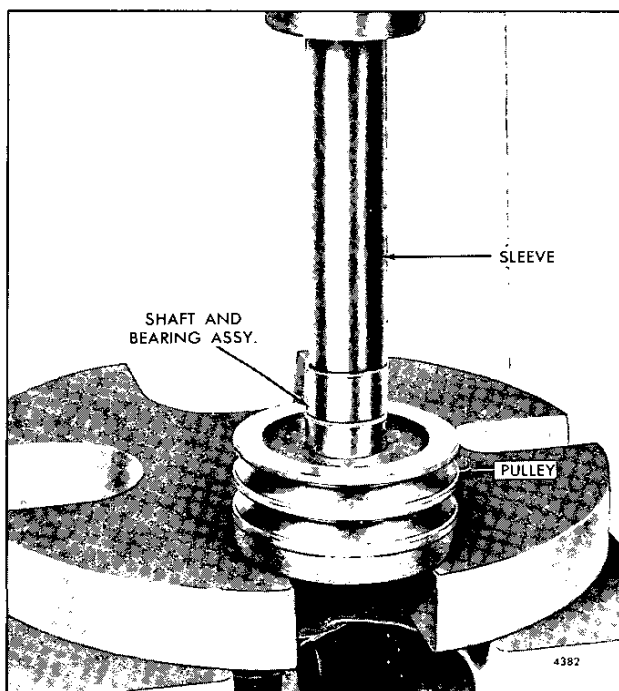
Installing Shaft and Bearing Assembly in Idler Pulley
